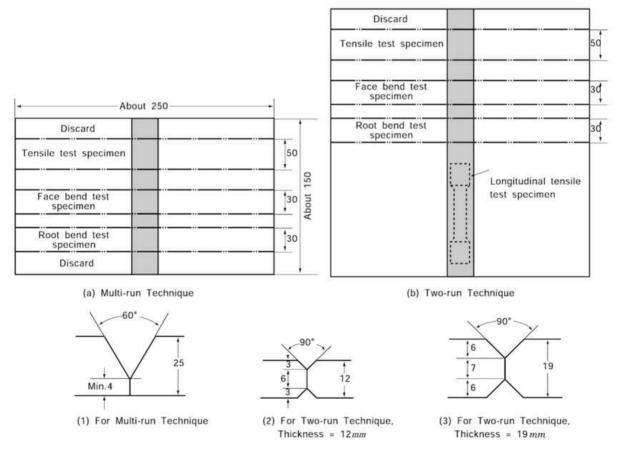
Butt Weld Test Assembly for Stainless Steel(Submerged arc welding, Unit: mm)
